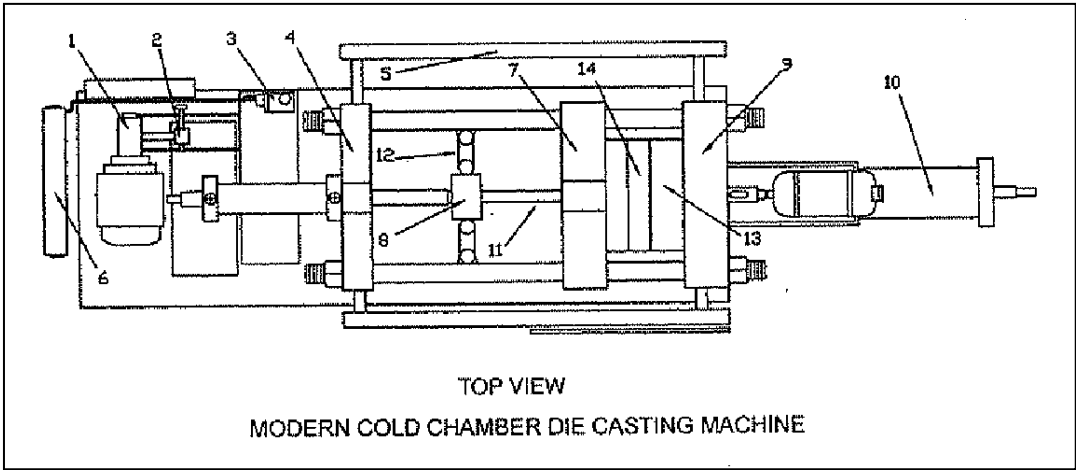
Key Components of Modern Cold Chamber Die Casting Machine from Top View [11].
